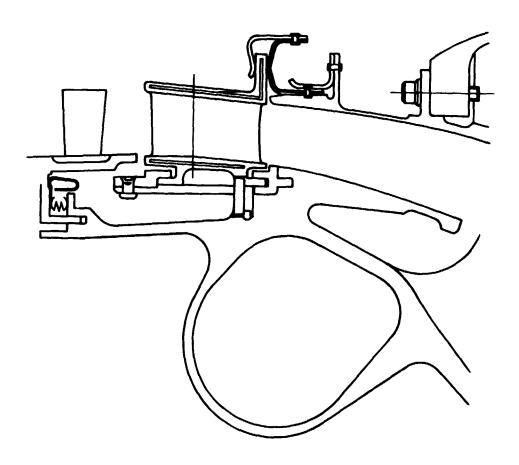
High-Pressure Compressor Exit Guide Vane Assembly
